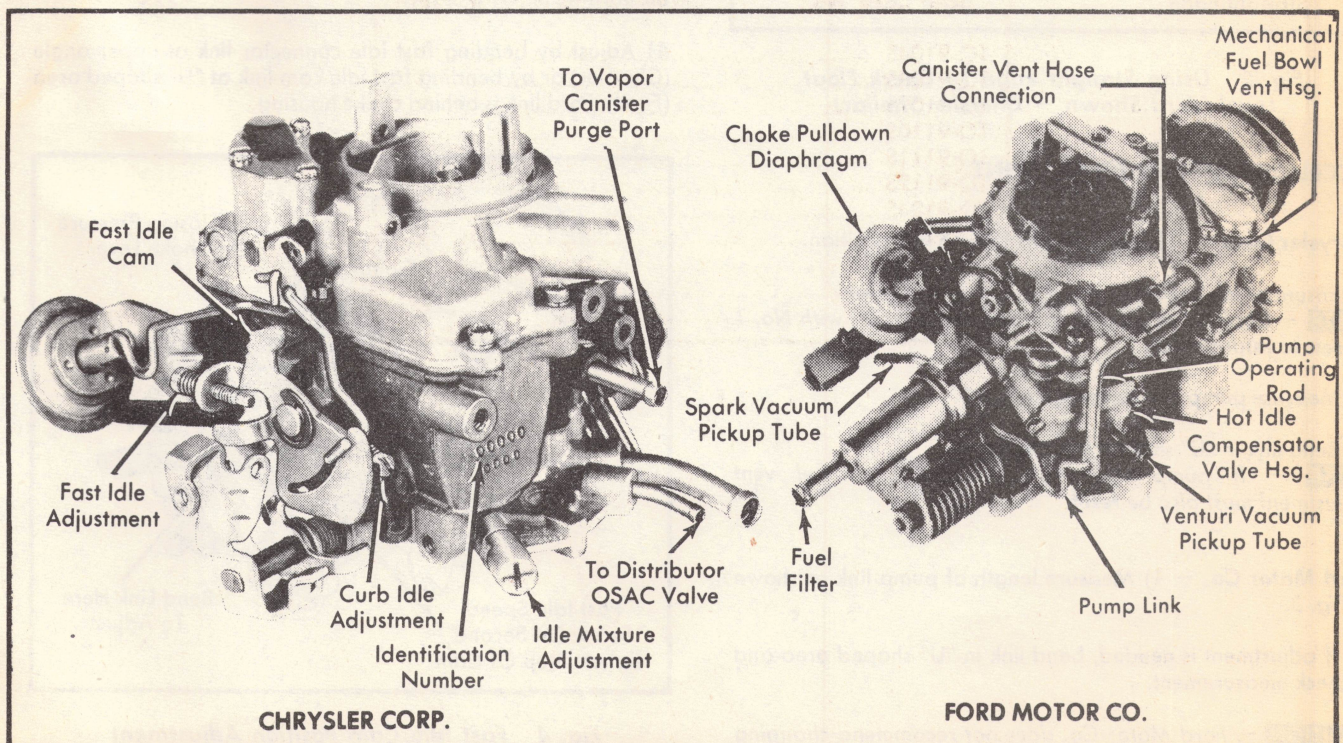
External Views Of Holley Model 1945 (Chrysler) & Model 1946 (Ford) Carburetors Showing Adjustment Locations & Attachments
